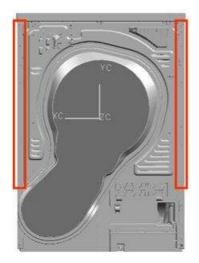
Connections between the side panel and the rear panel at the back side of the dryer
